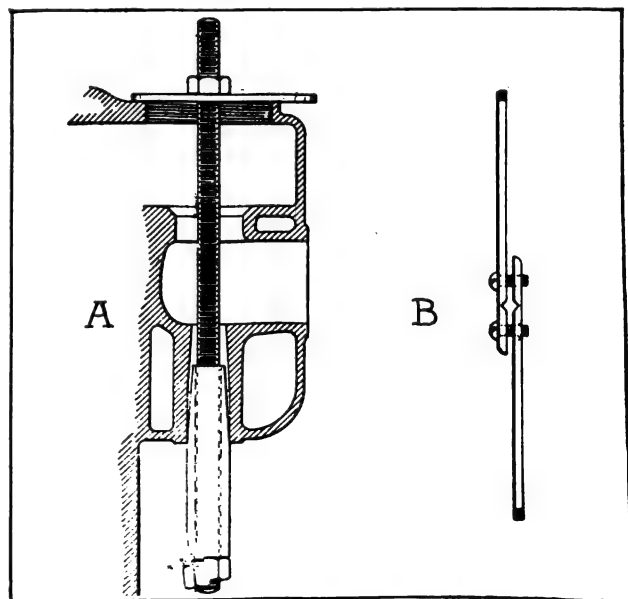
A, Special Tool for Setting Valve Guide in Cylinder Casting; B, Handy Tap Wrench.
